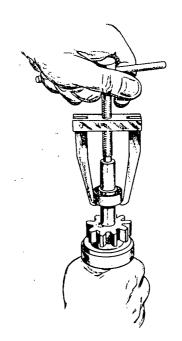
MOUNTING OVERRUNNING CLUTCH
